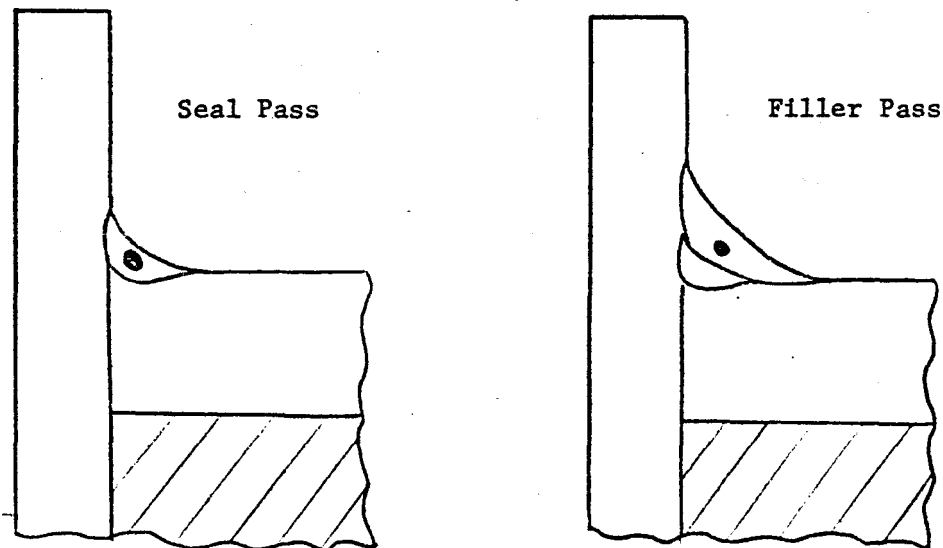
Propagation of Porosity in a Double Pass Fillet Weld
